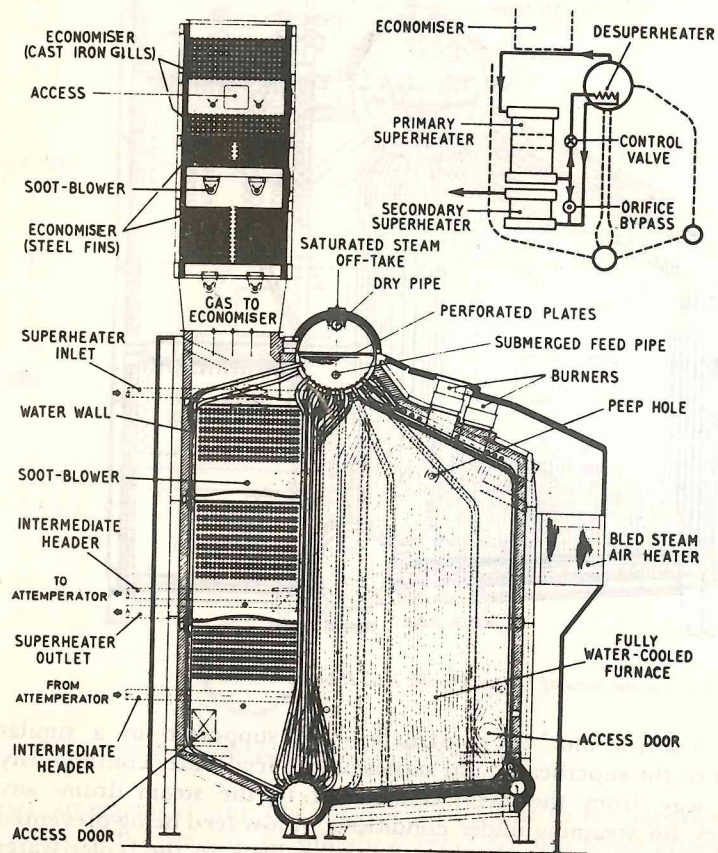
Sectional view of Foster Wheeler Type ESD III boiler
